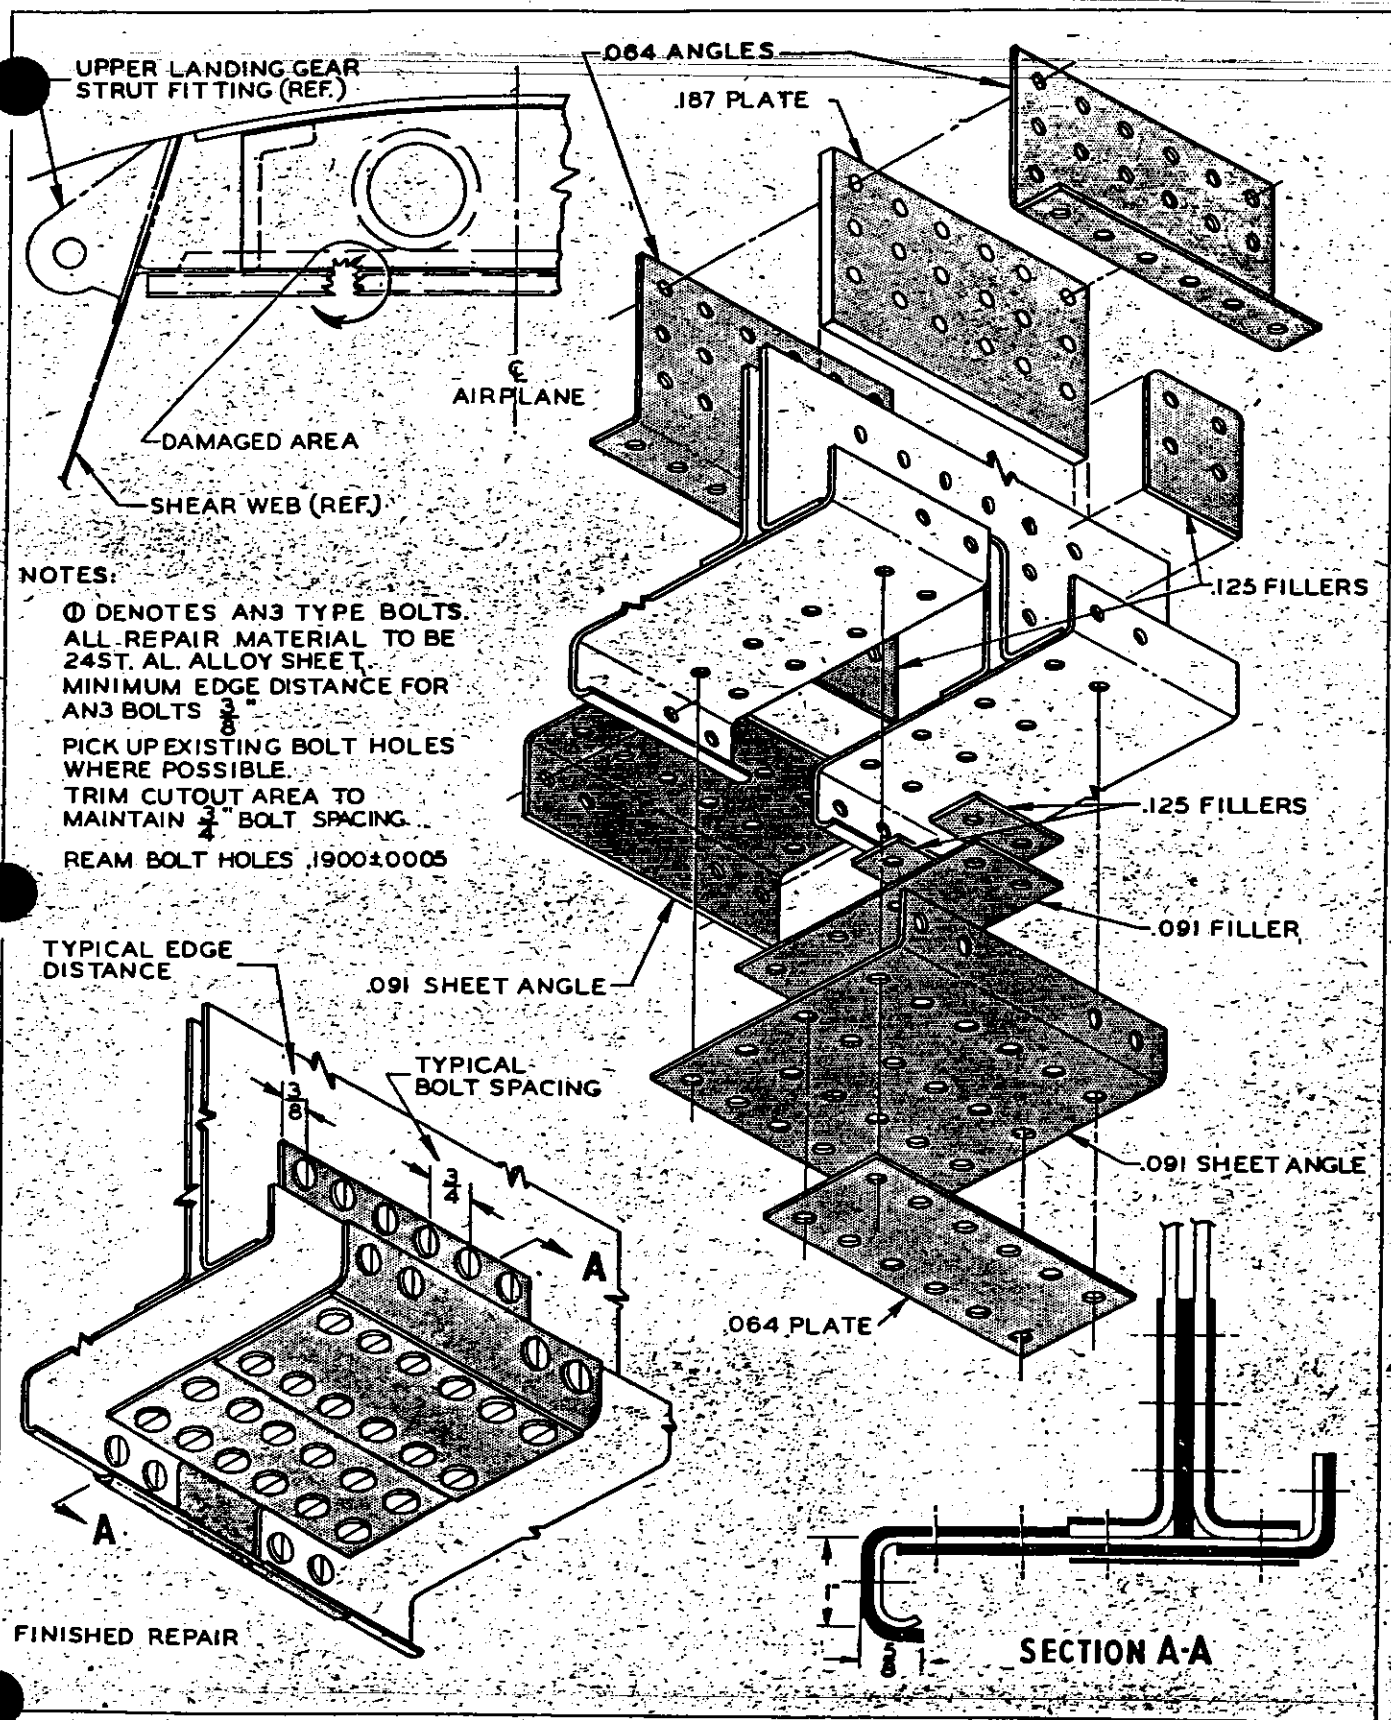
(Sheet 3 of 5 Sheets)—Main Wheel Well Enclosure Repair
